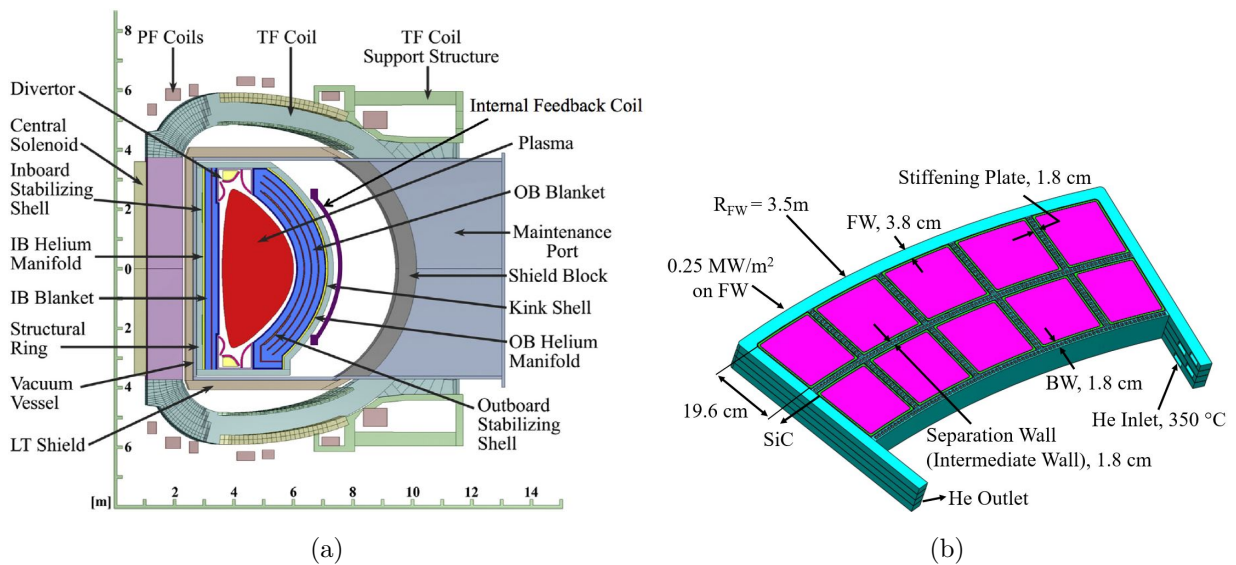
(a) Cross-sectional view of FNSF showing details of the FW/B system and how it fits inside the TF magnet system [69]. (b) FW/B structure showing significant dimensions and loading conditions
